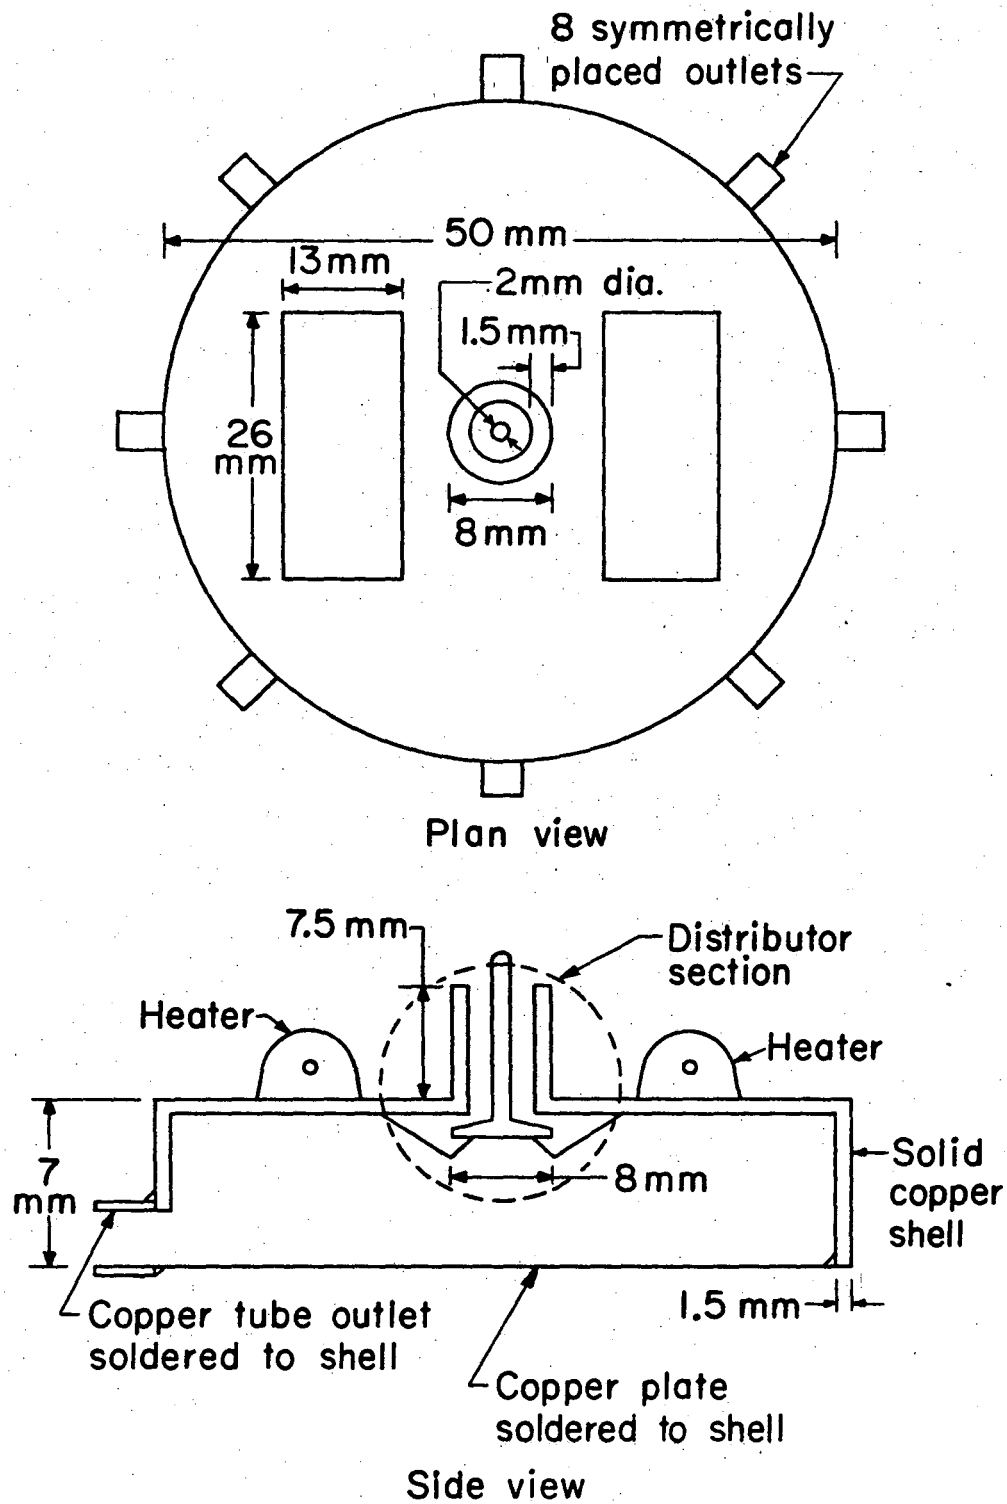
Free Surface Spray Cooler Design and Dimensions.
